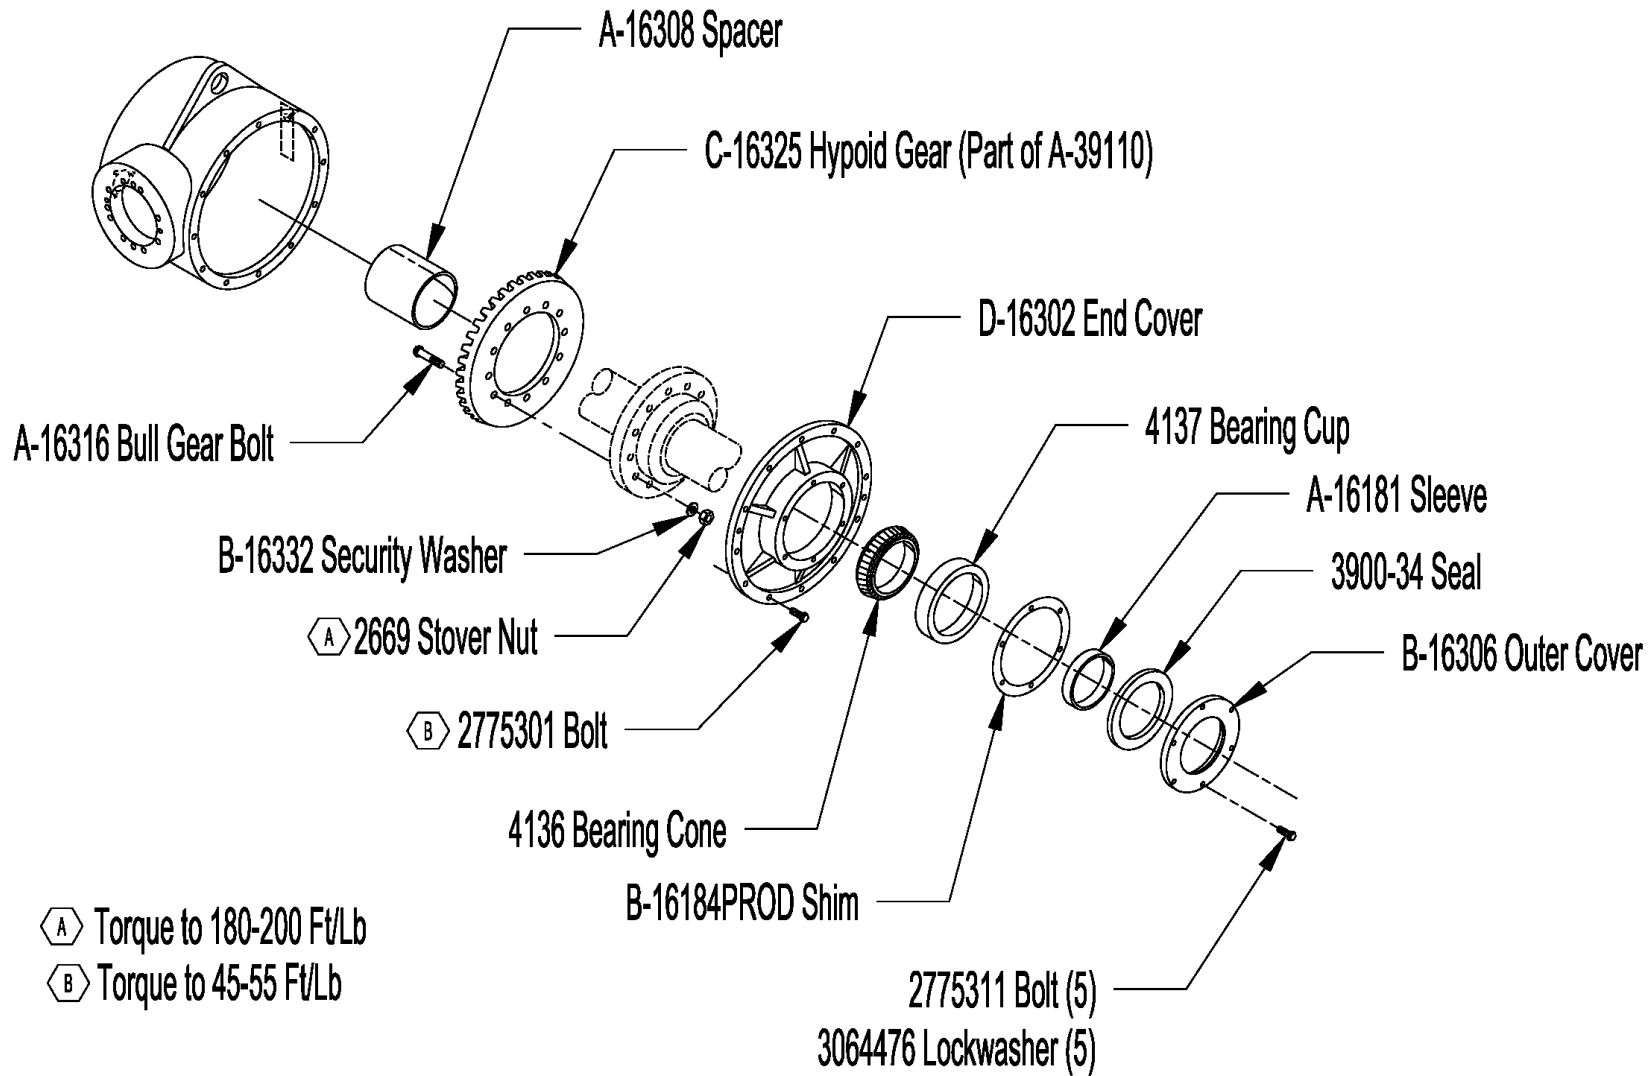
Axles and Drive Housing 35 mph w/24" Demountable Wheels
